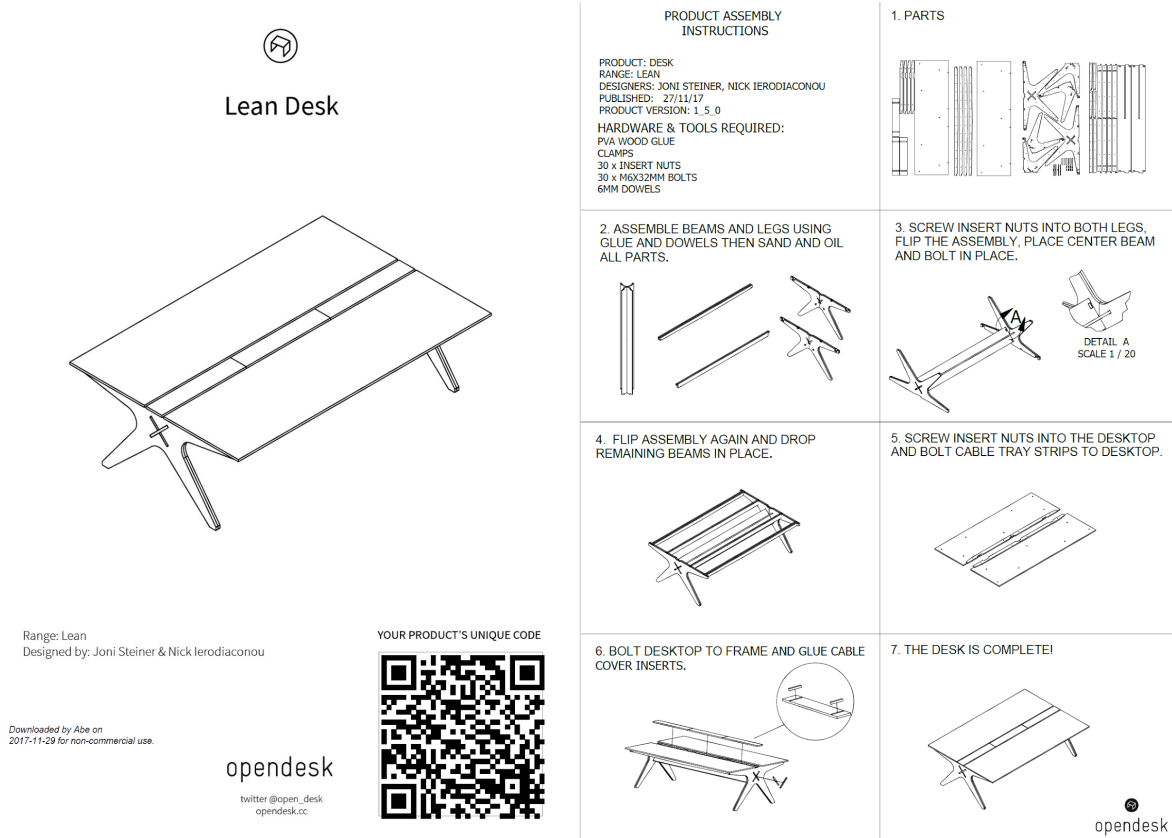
Assembly Guide for *Lean Desk* courtesy of Opendesk
